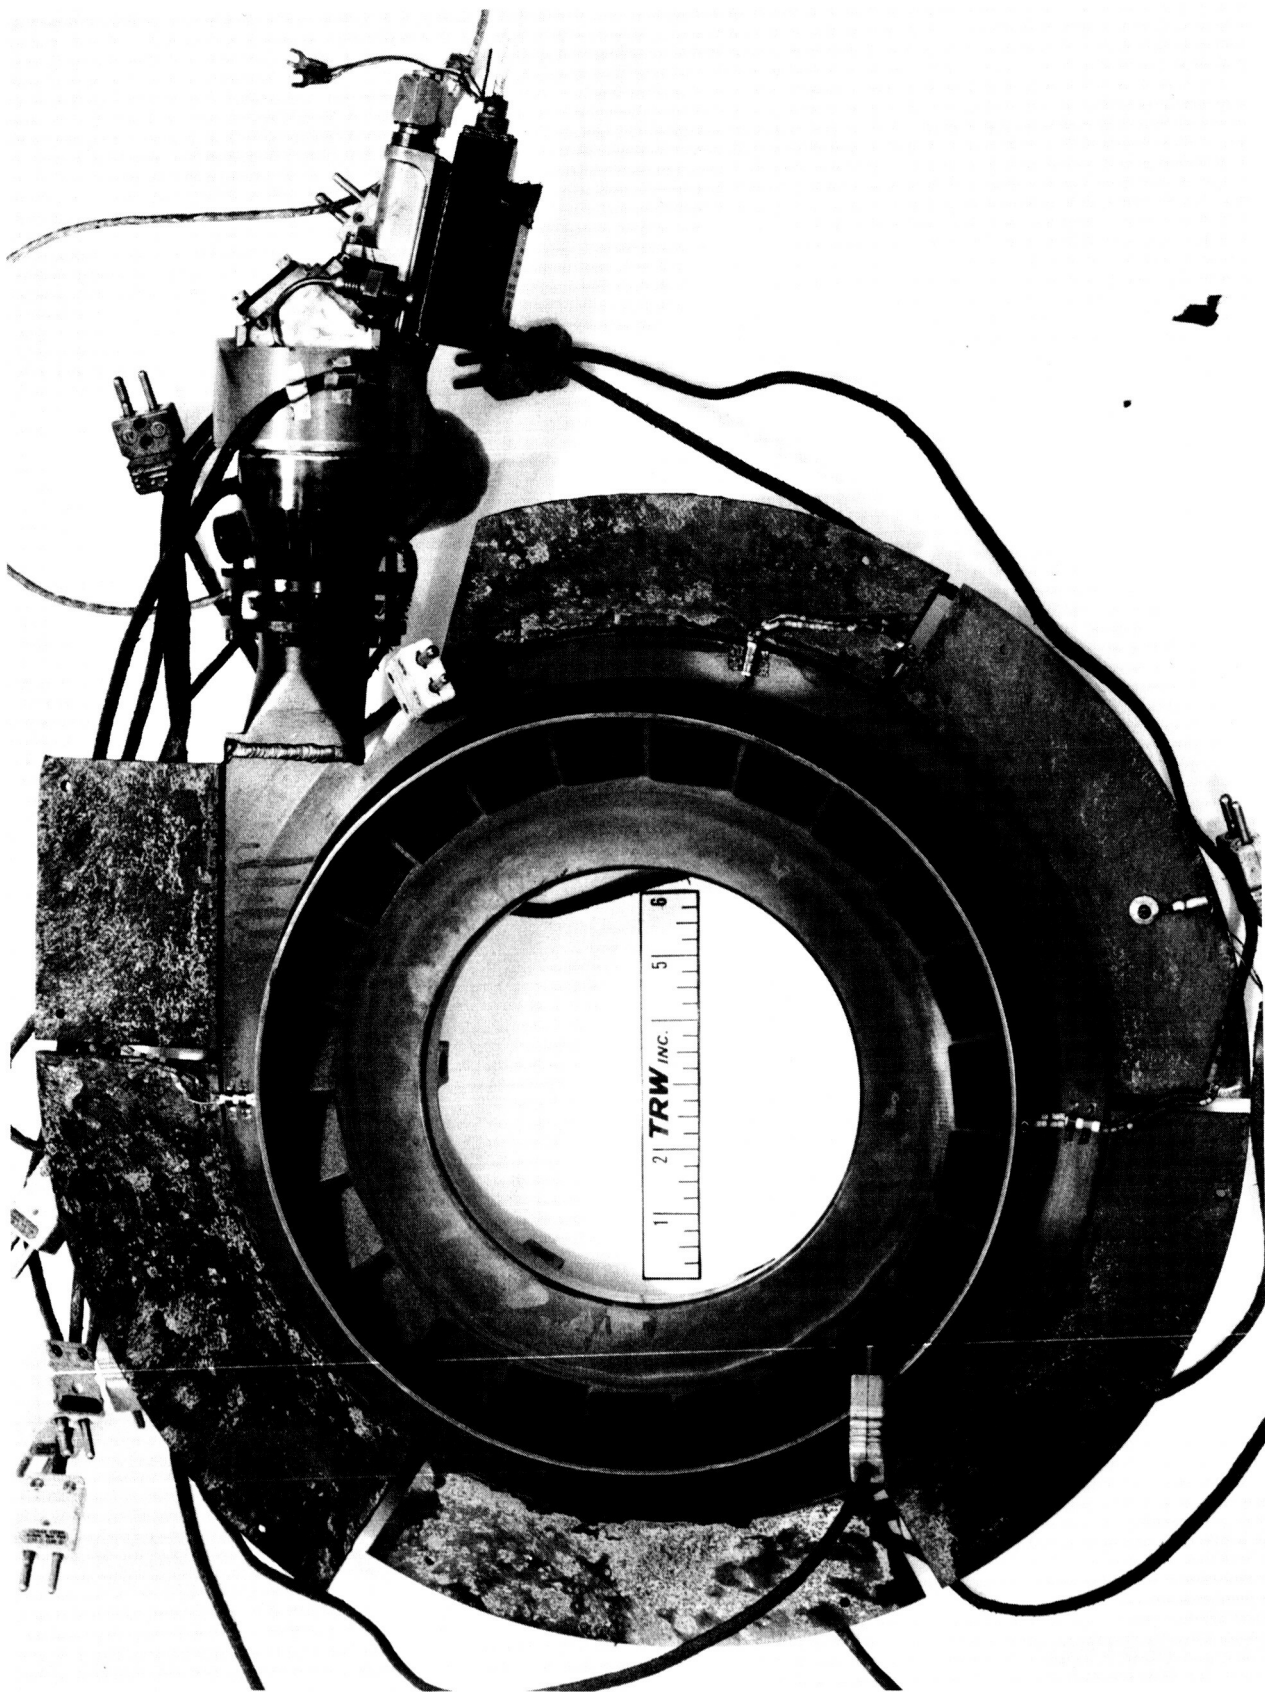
TURBINE SCROLL AND GAS GENERATOR - TURBINE SIDE
